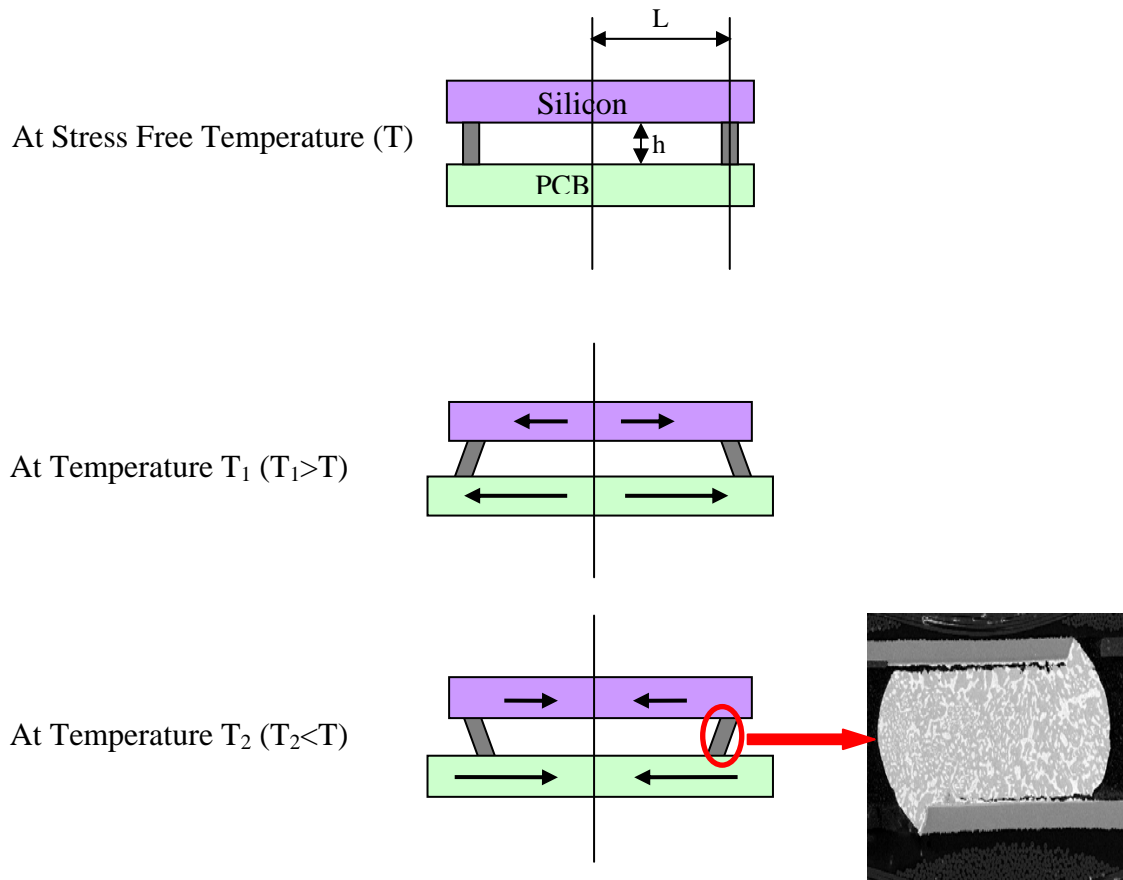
Solder joint fatigue failure due to thermal cycling
